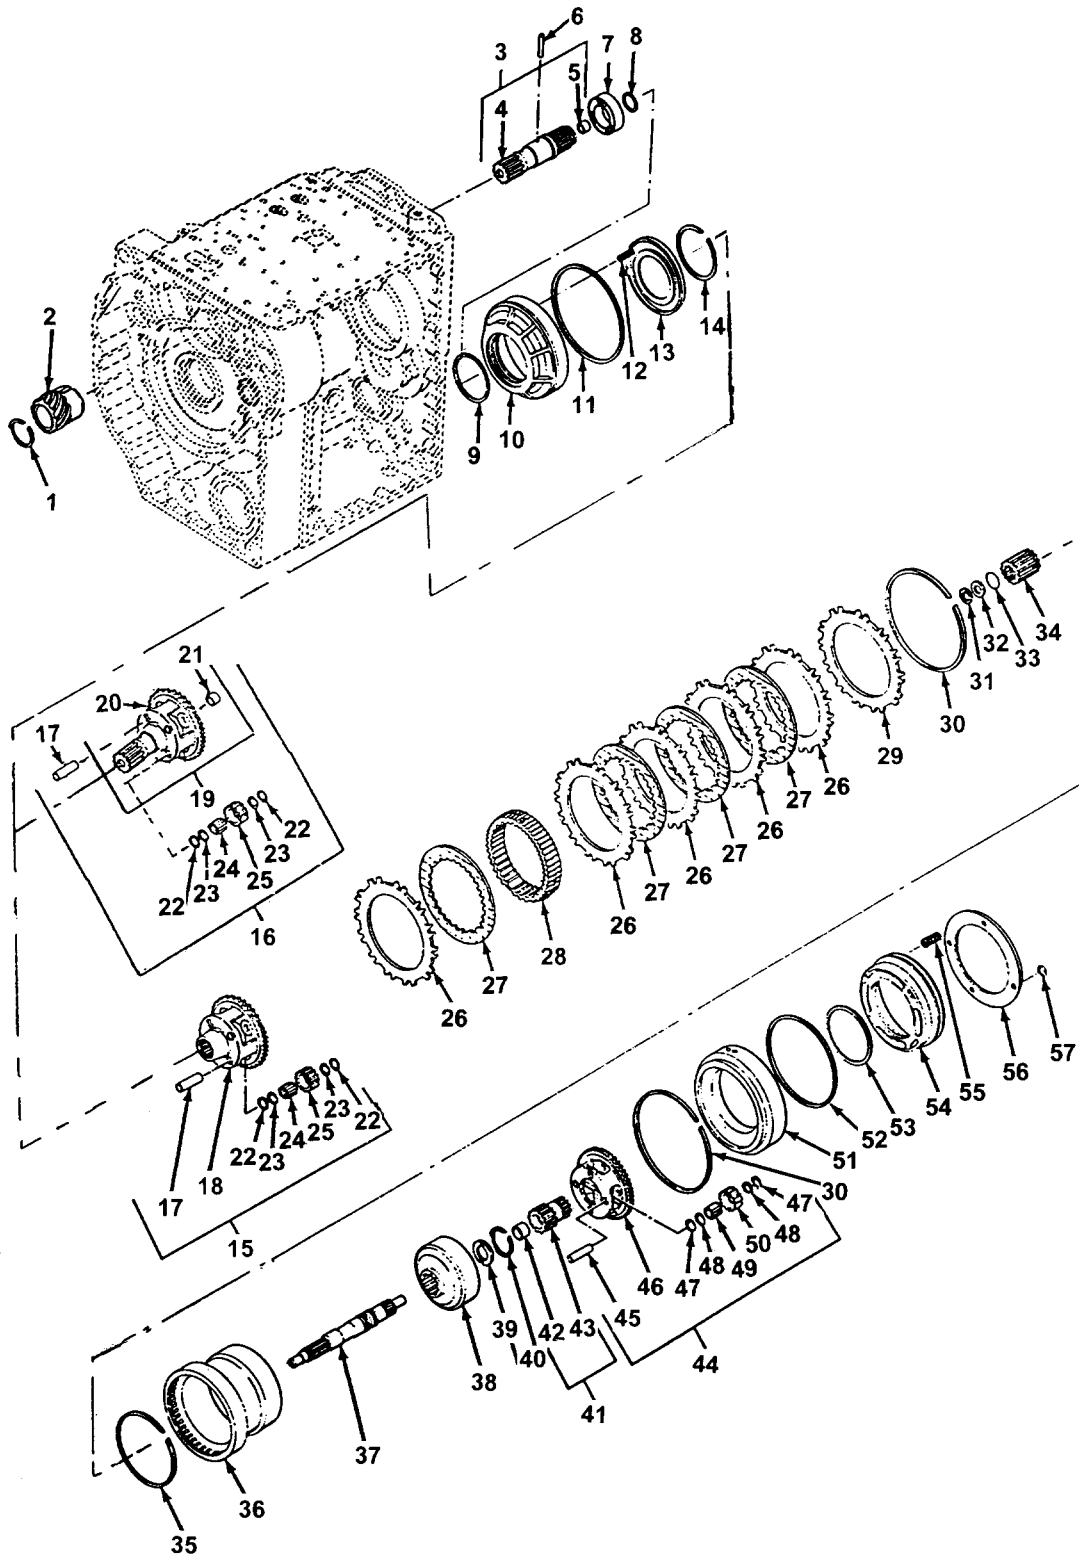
First Clutch, Center Carrier and Rear Carrier.
